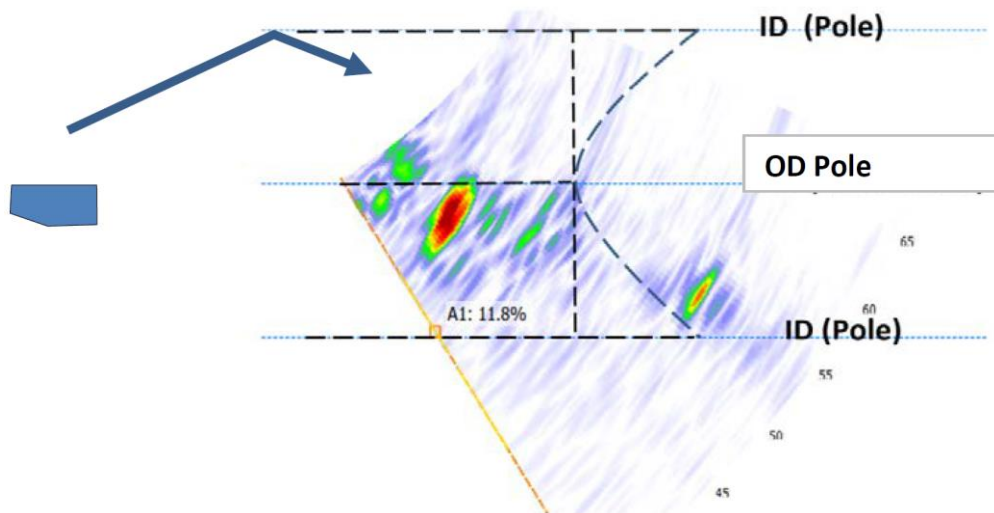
Scan of the Fillet Weld from the Shaft Side
